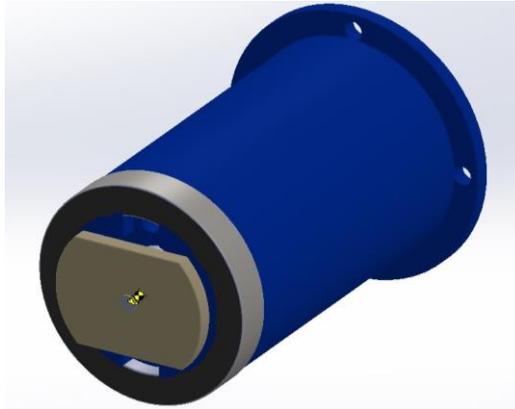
Neoyama Motor Assembly with Housing, Coupling and Watertight Bearing
